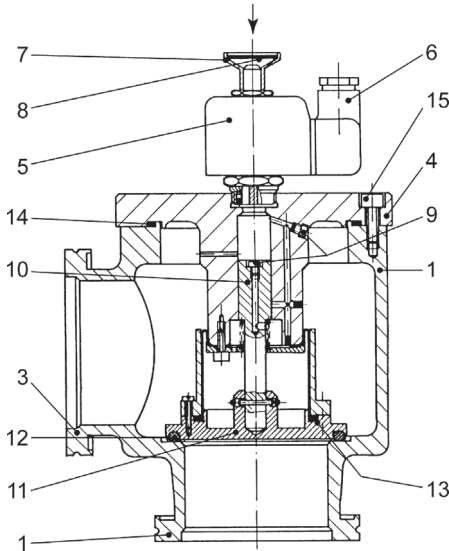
Section of safety valve SECUVAC. 1: housing; 2: connecting flange to vacuum equipment; 3: connecting flange for pump; 4: cable connection; 5: air intake valve (electromagnetic); 6: air intake, with 8: filter disk; 9: nozzle; 10: piston; 11: valve plate; 12: valve plate seal; 13: roll diaphragm; 14: seal; 15: connecting bolt.
